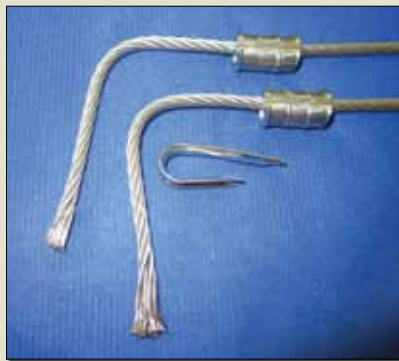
Fig. B. Under load, samples crimped larger than the gauge dimension often failed by pull-through, rather than cable failure.
